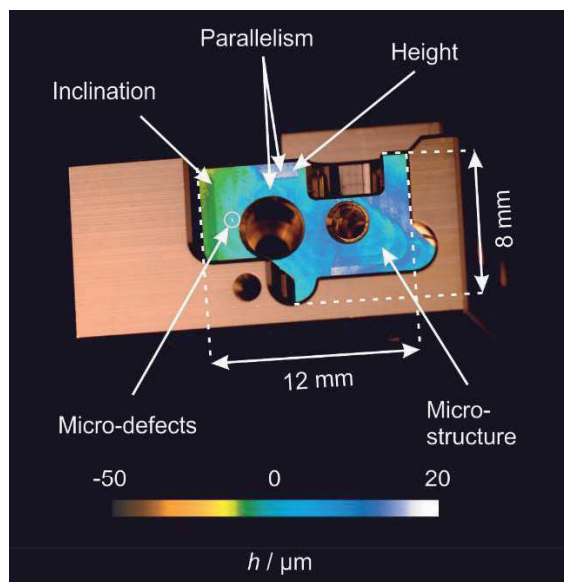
HoloPort maps the component surface in the fraction of a second with micrometer accuracy directly in the machine tool (as in the example of a heat sink for laser assembly). Alongside the geometry, relevant surface parameters such as micro-defects and microstructures as well as the height, parallelism and inclination of surfaces can be measured simultaneously.
